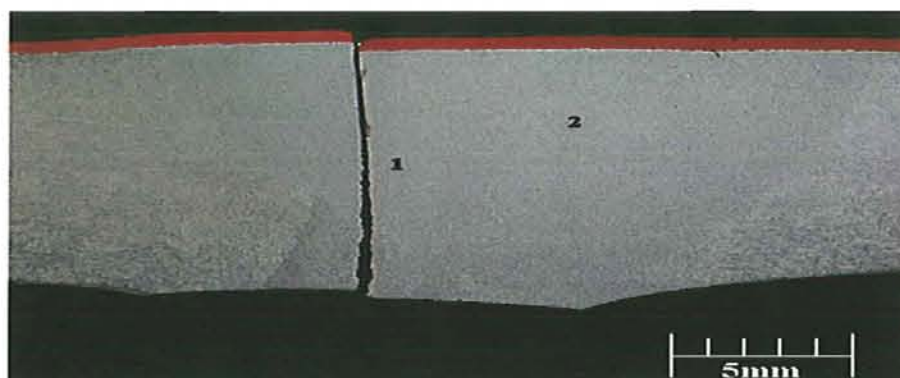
Cross Section of the Cold Weld Shown in Figure 20
